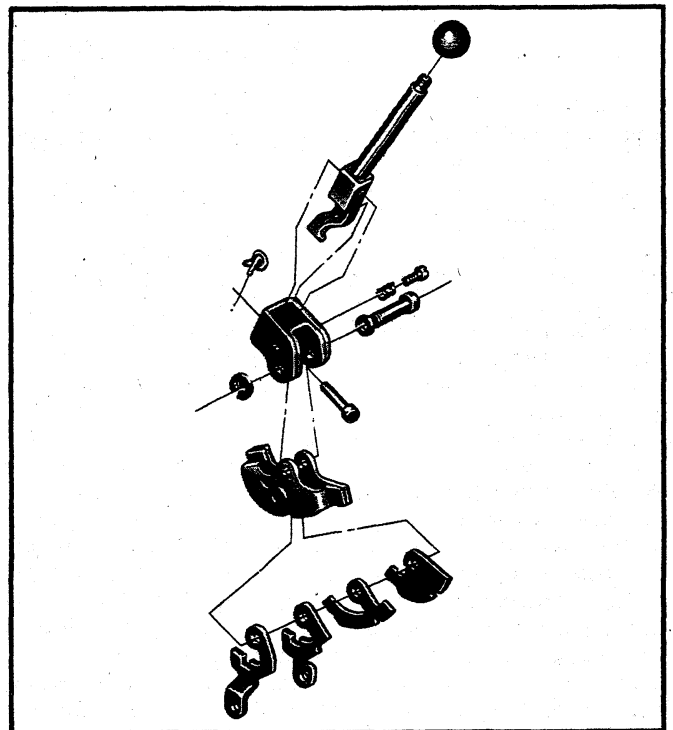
A - Corvette 3 Speed Control Lever and Bracket Assembly
